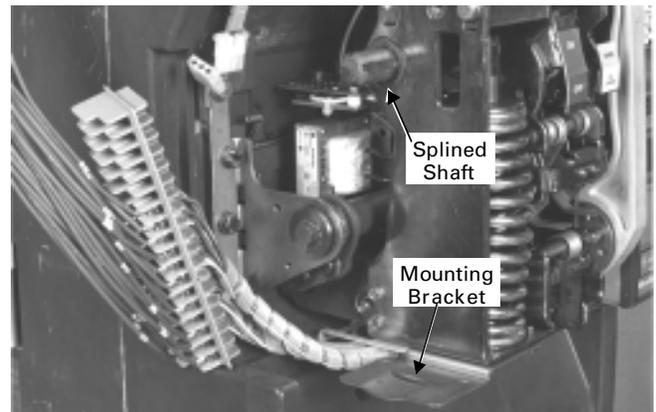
Mounting bracket attached to the stop block on the spring frame.
